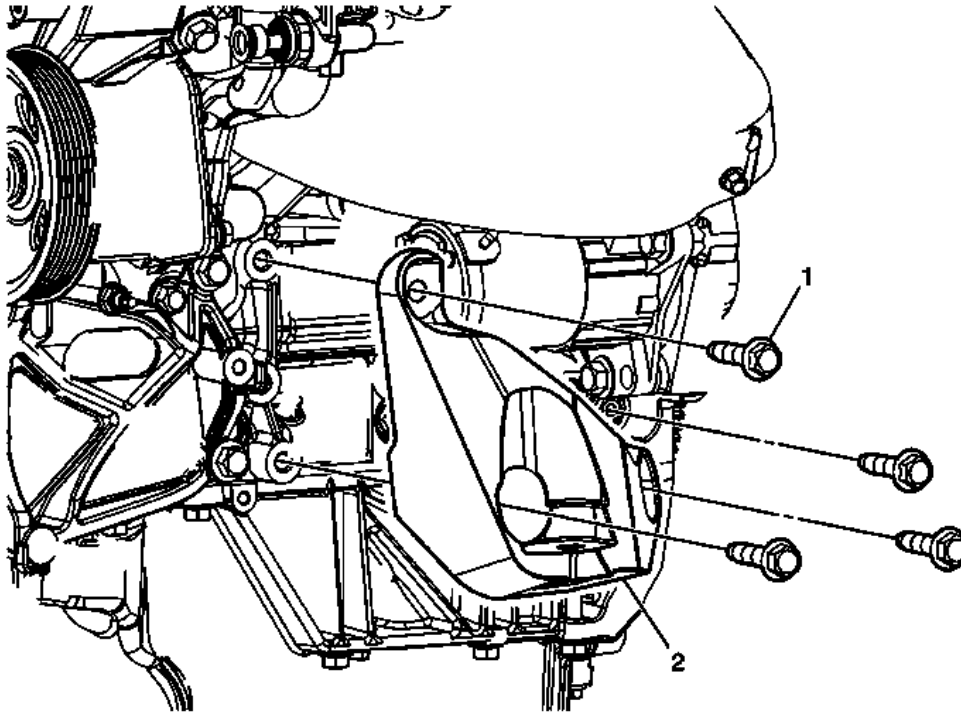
Engine Mount Bracket And Fasteners - Left Side
